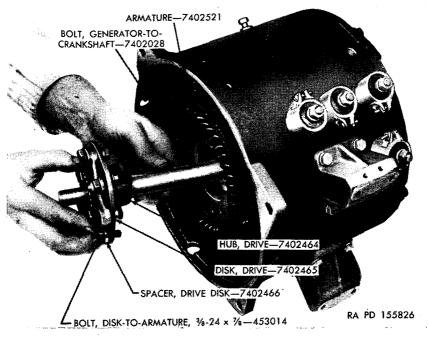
Installing generator drive hub-to-crankshaft bolt.
